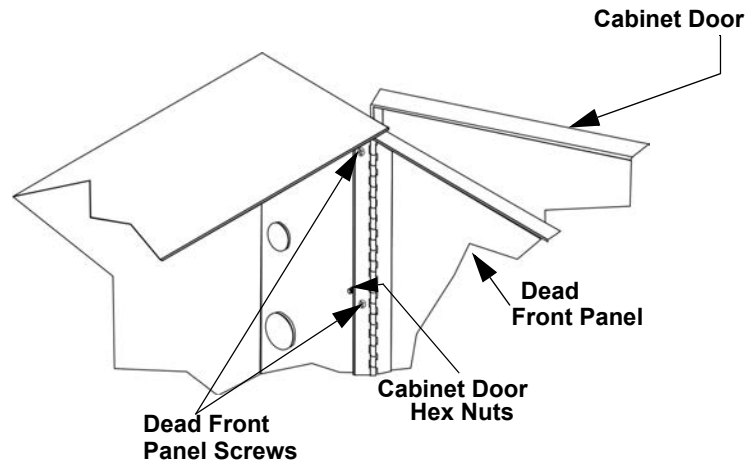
Cabinet Door and Dead Front Panel Removal
